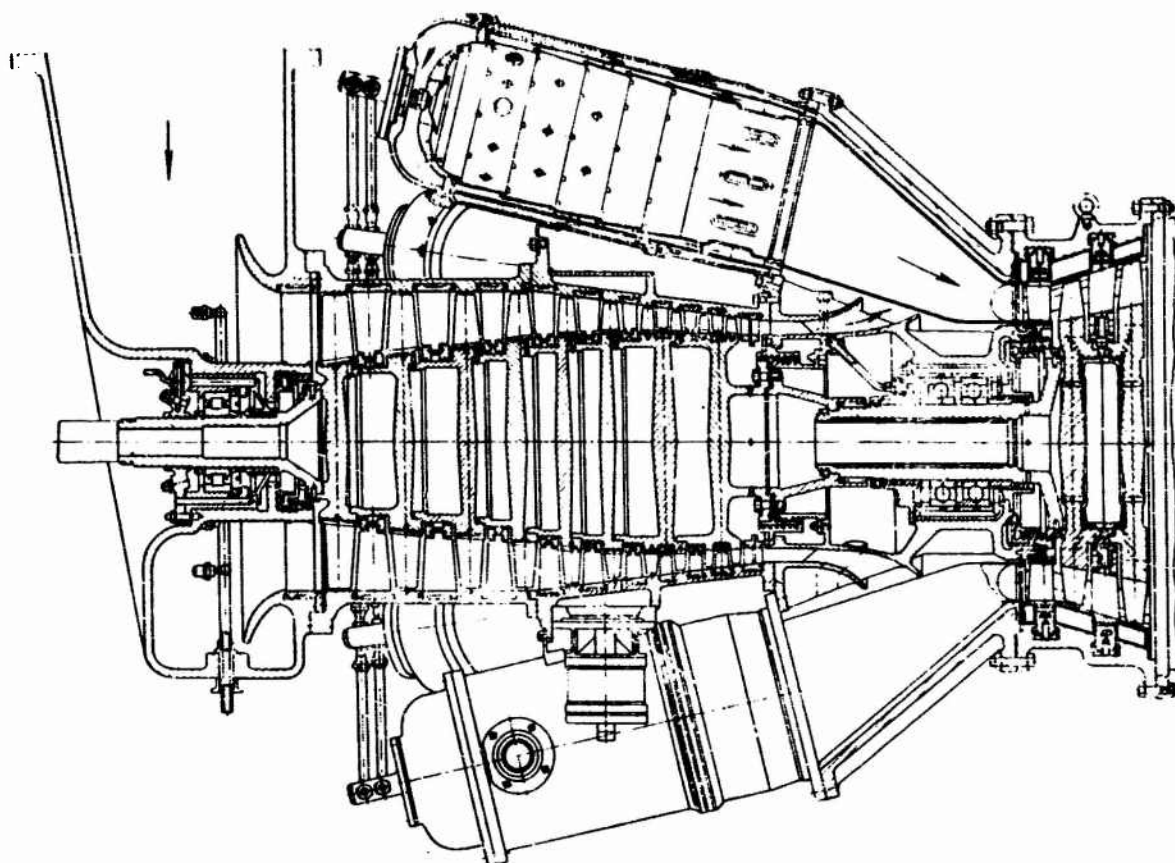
Sectional reverse-flow combustion chamber of a locomotive GTD.
